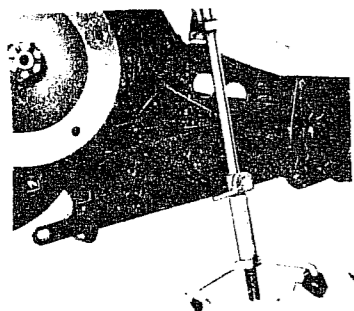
Pulling the spring plate into alignment with the axle tube - Swing axle.
